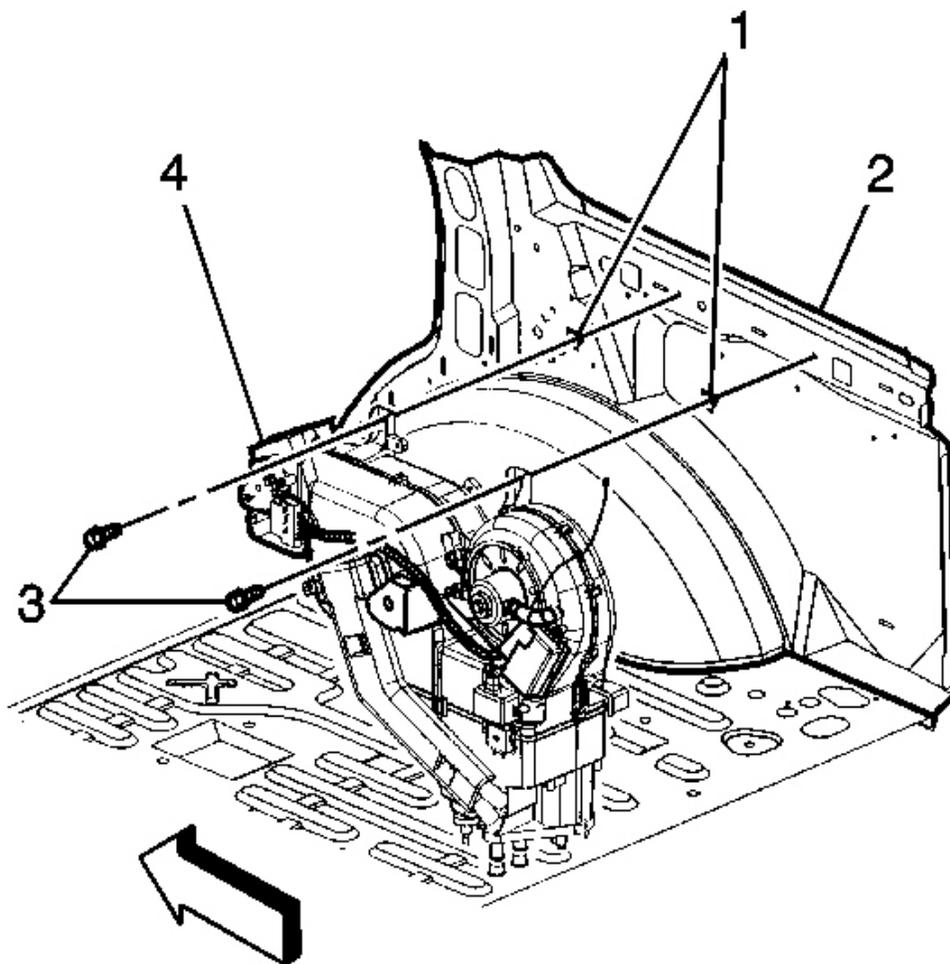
View Of Auxiliary HVAC Module (Tahoe/Yukon)
